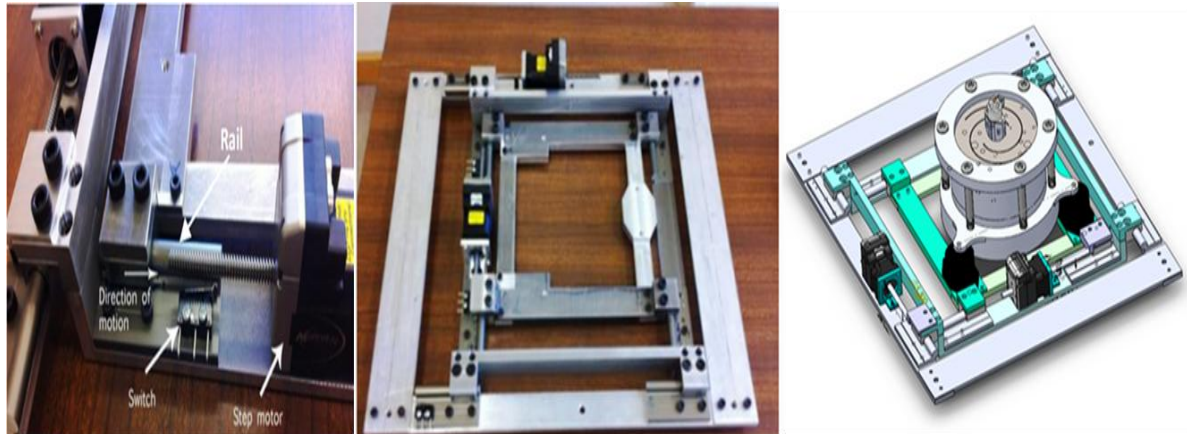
Showing positions of the rail, limit switches and stepper motors (top left), final design of the 2-axis positioning system (top right), and Solidworks representation of 2-axis positioning system with actuator mounted on the damping feet (bottom)
